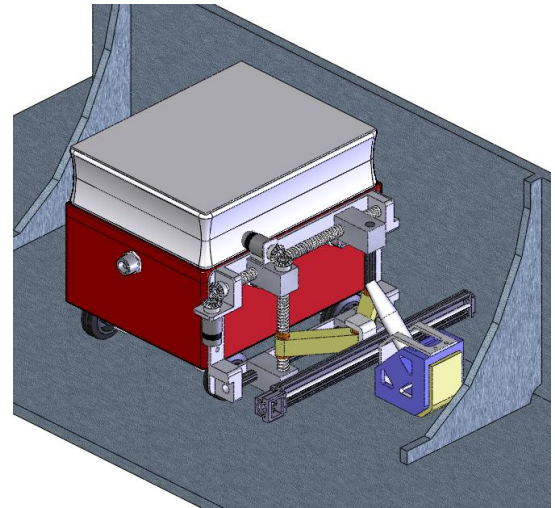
Scanner mounted on front face of robot, shown deploying an ACFM NDT probe while located between two stiffener plates in a FPSO tank
